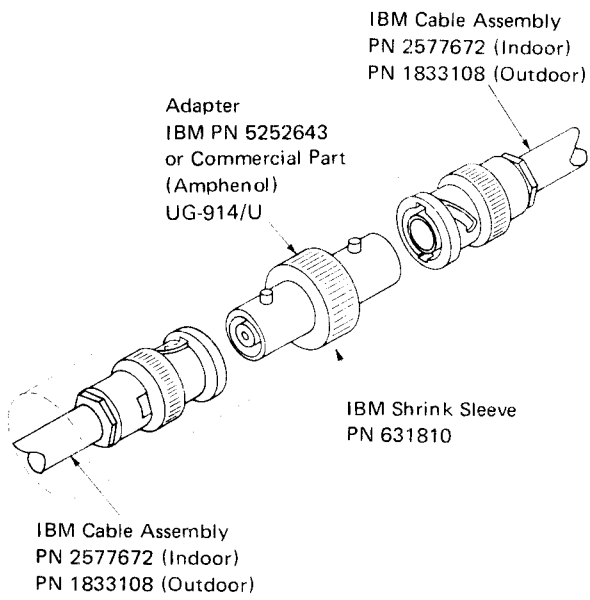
Cable Adapter for Joining Coaxial Cables
